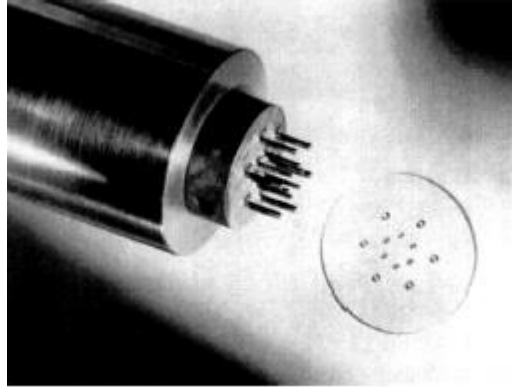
The tool and finished part from an ultrasonic machining setup capable of drilling multiple holes simultaneously. Figure from [12].
